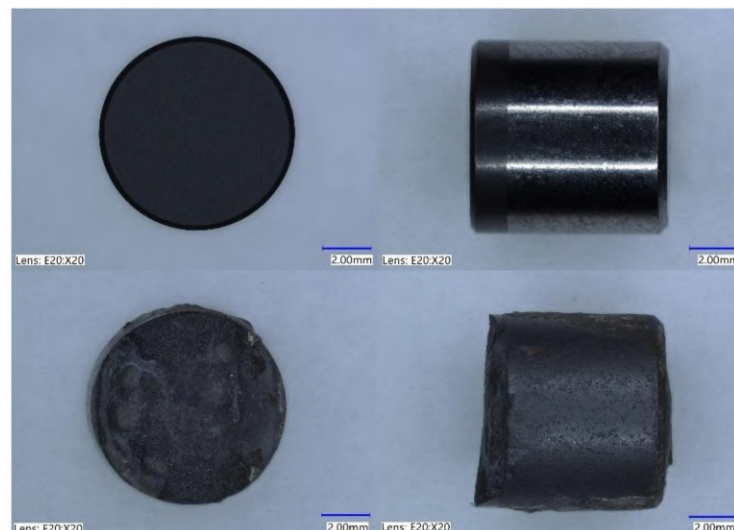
Typical tool used in the chainsaw cutting machine. The front and side views are shown on the left and right of the image, respectively. A new tool is shown above: the color difference between polycrystalline diamond (shorter area) and tungsten carbide (longer area) is clearly recognizable from the top right image. Below is shown a tool after 0.24 h/m^2 of work: the almost complete absence of the polycrystalline diamond layer is evident.
